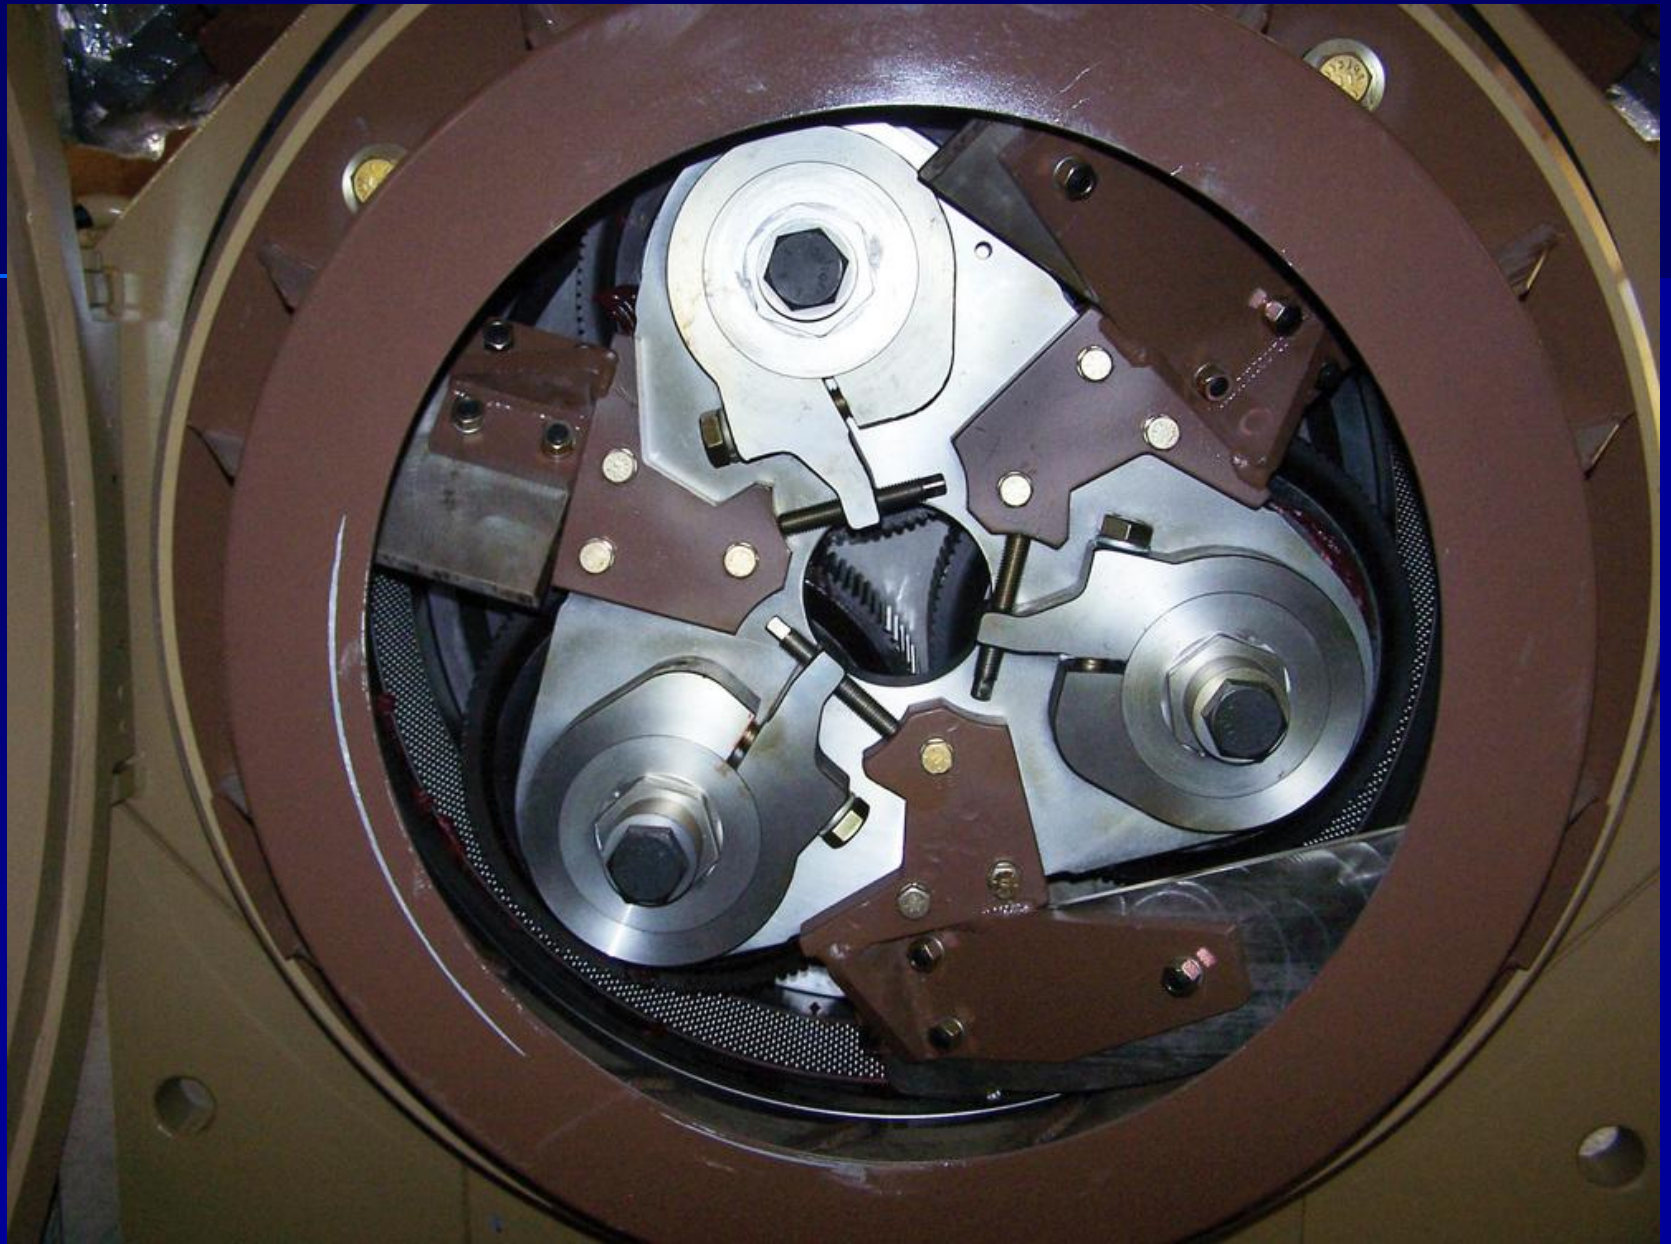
Typical Die and Roller Assembly Used for Producing Hard Pellets
